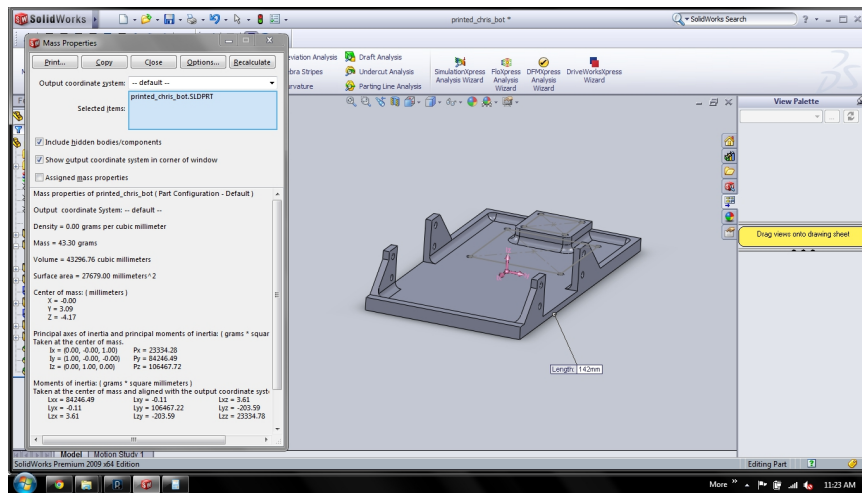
Miniature UGV SolidWorks Design, Version 1
